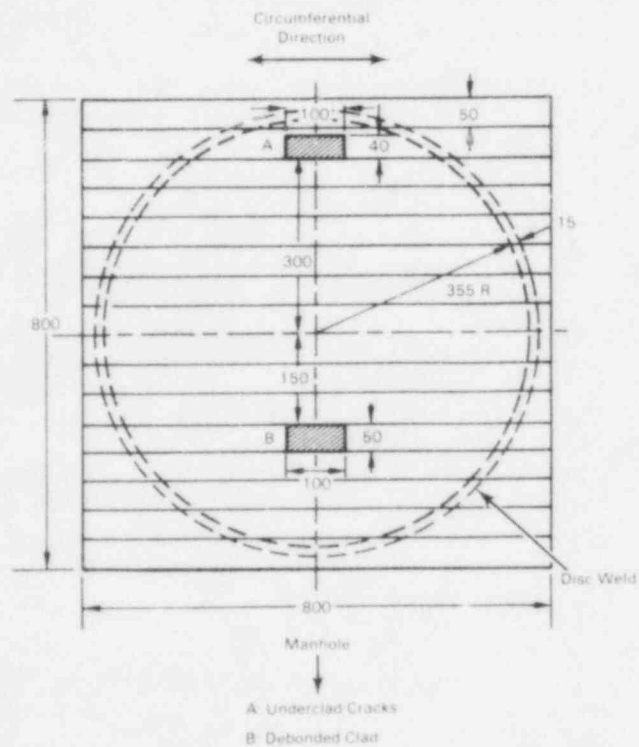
Details of Weld Cladding with Defects.
